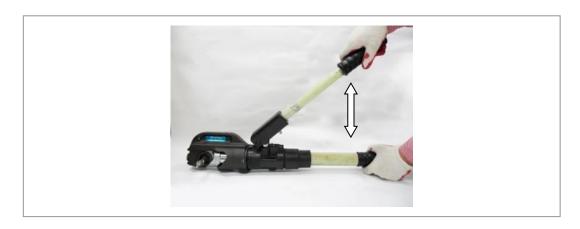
Fixing Pressure Terminal_Hydraulic Press (4)
